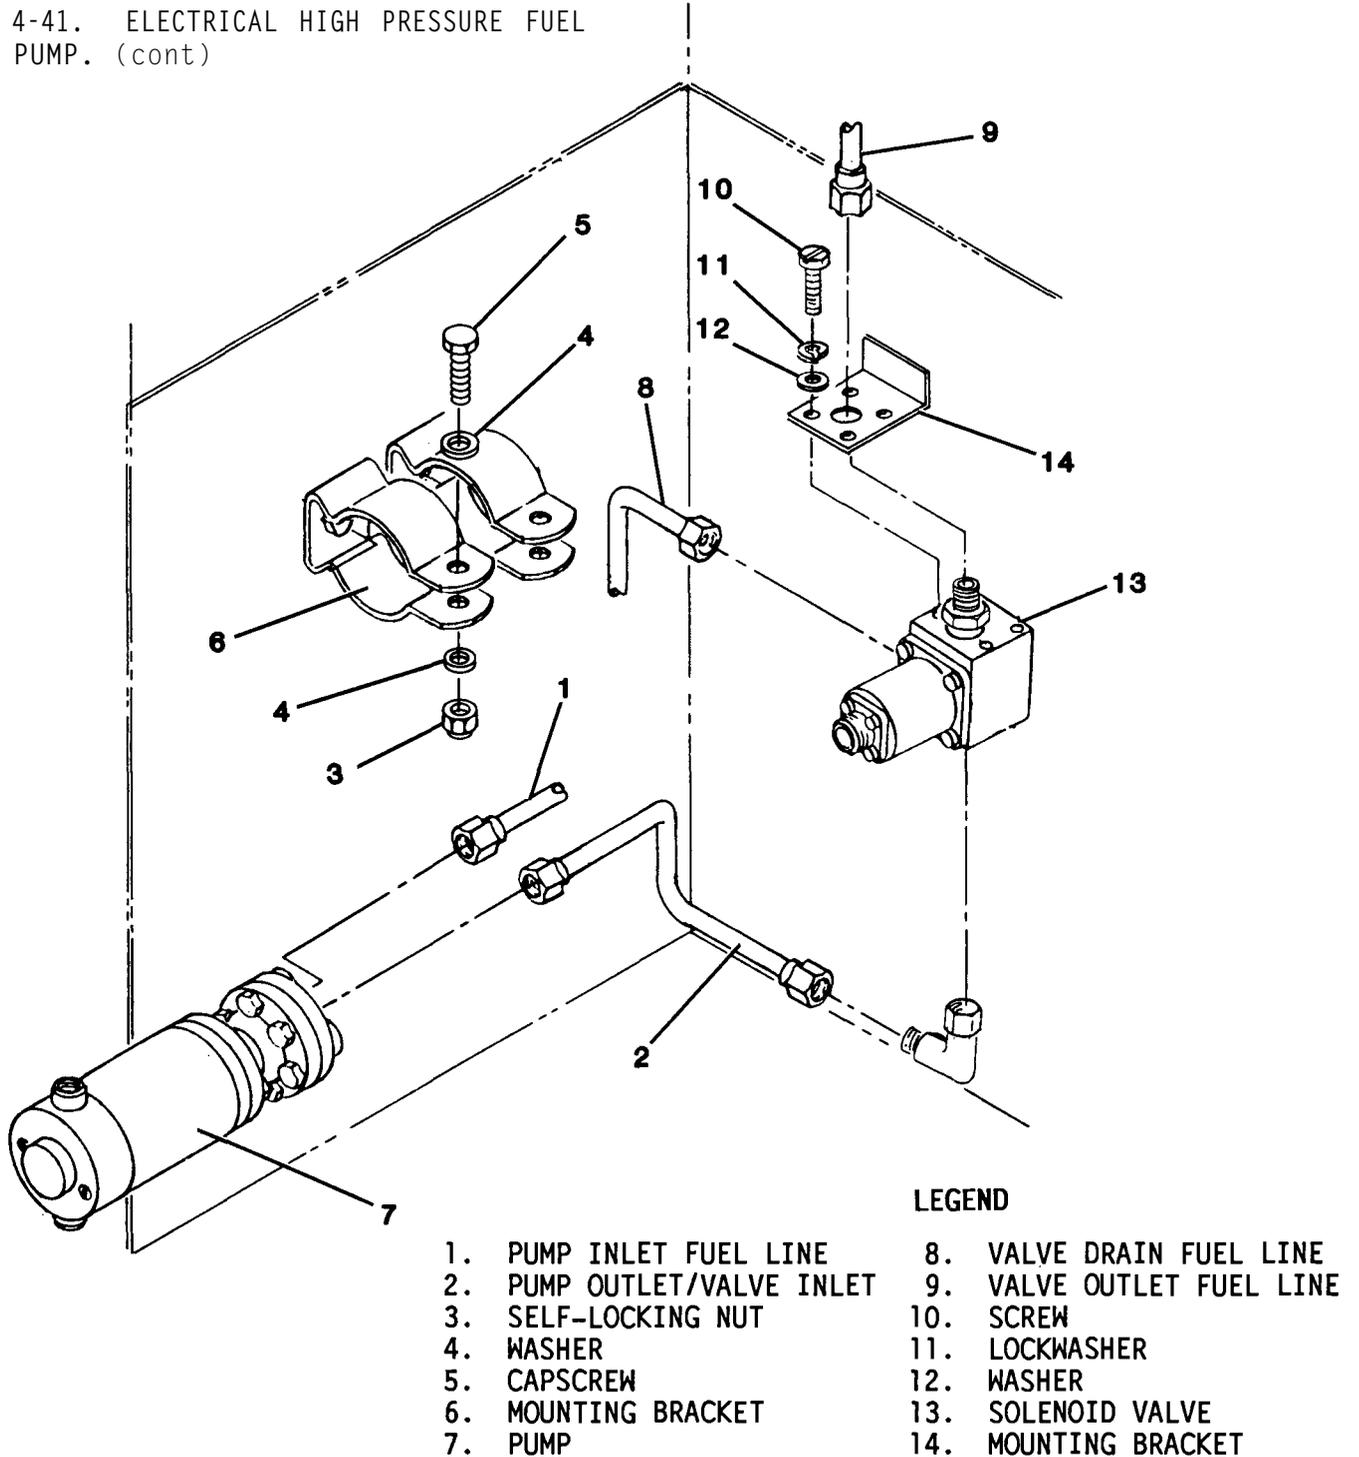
Electrical Fuel Pump (High Pressure) and Solenoid Valve Removal
